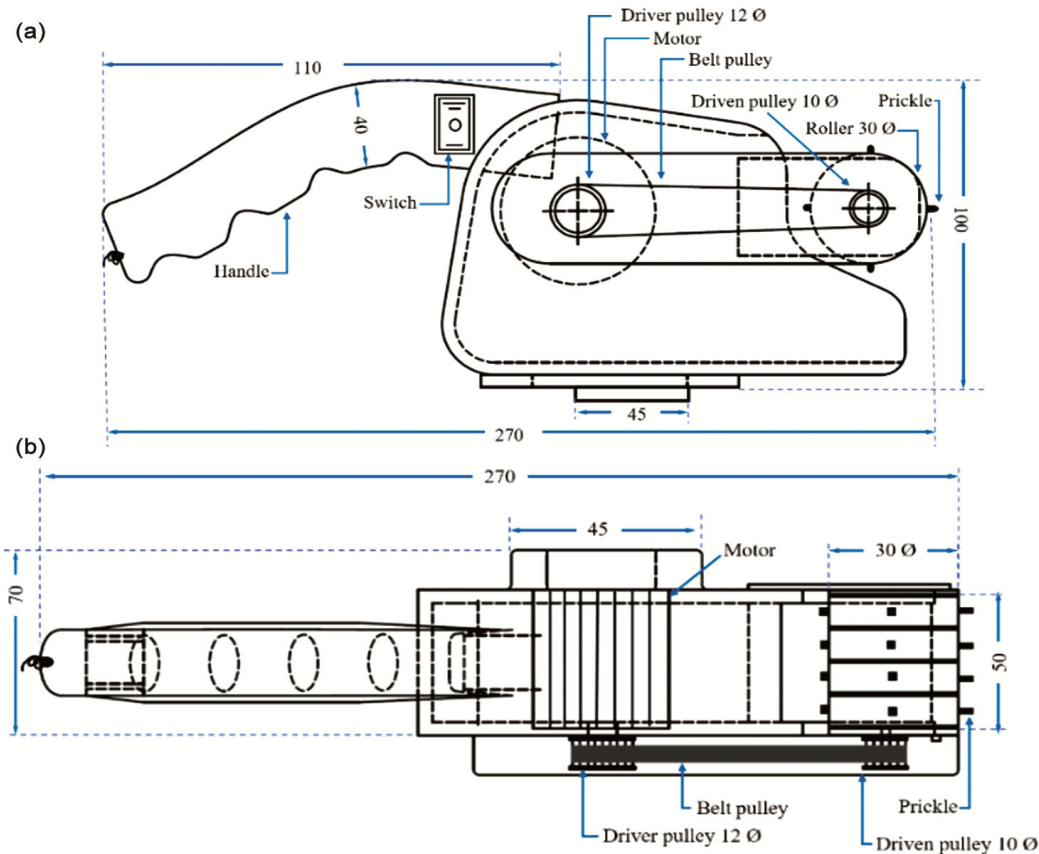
CAD view of the roller-type end-effector (dimensions in mm) illustrating (a) the side view showing the prickle arrangement on the roller and (b) the top view depicting the belt arrangement between the driver and driven pulleys for roller rotation.
